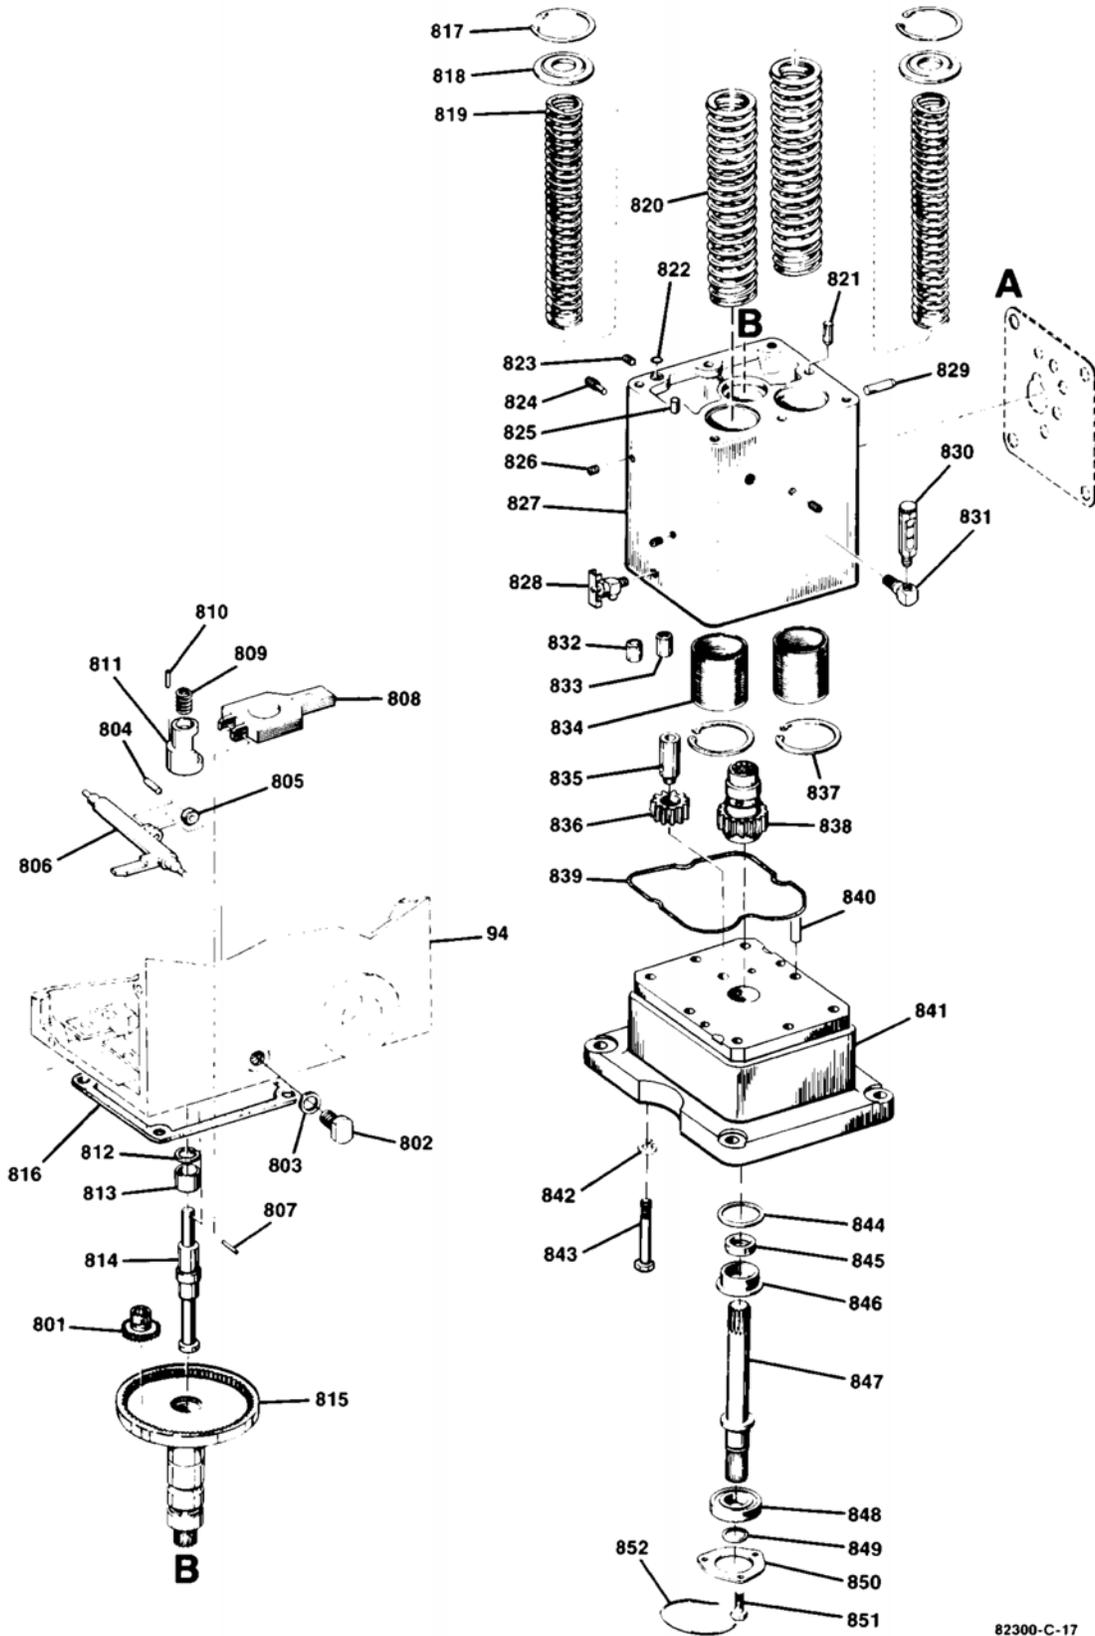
Column Assembly Parts, EGB-29P/-58P
